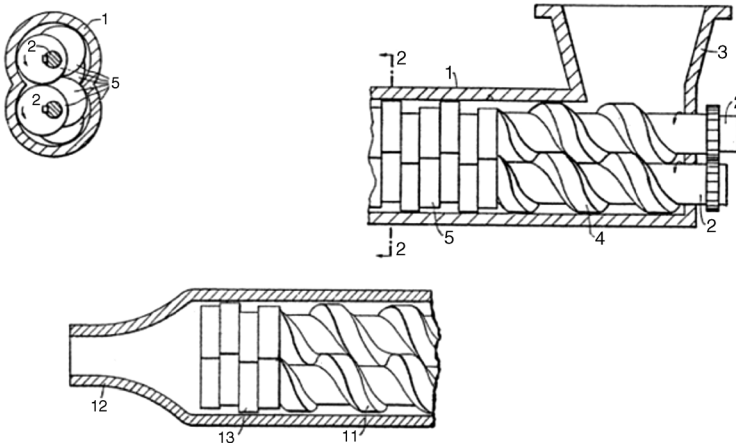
Erdmenger 1958 modular co-rotating twin-screw extruder [87].
